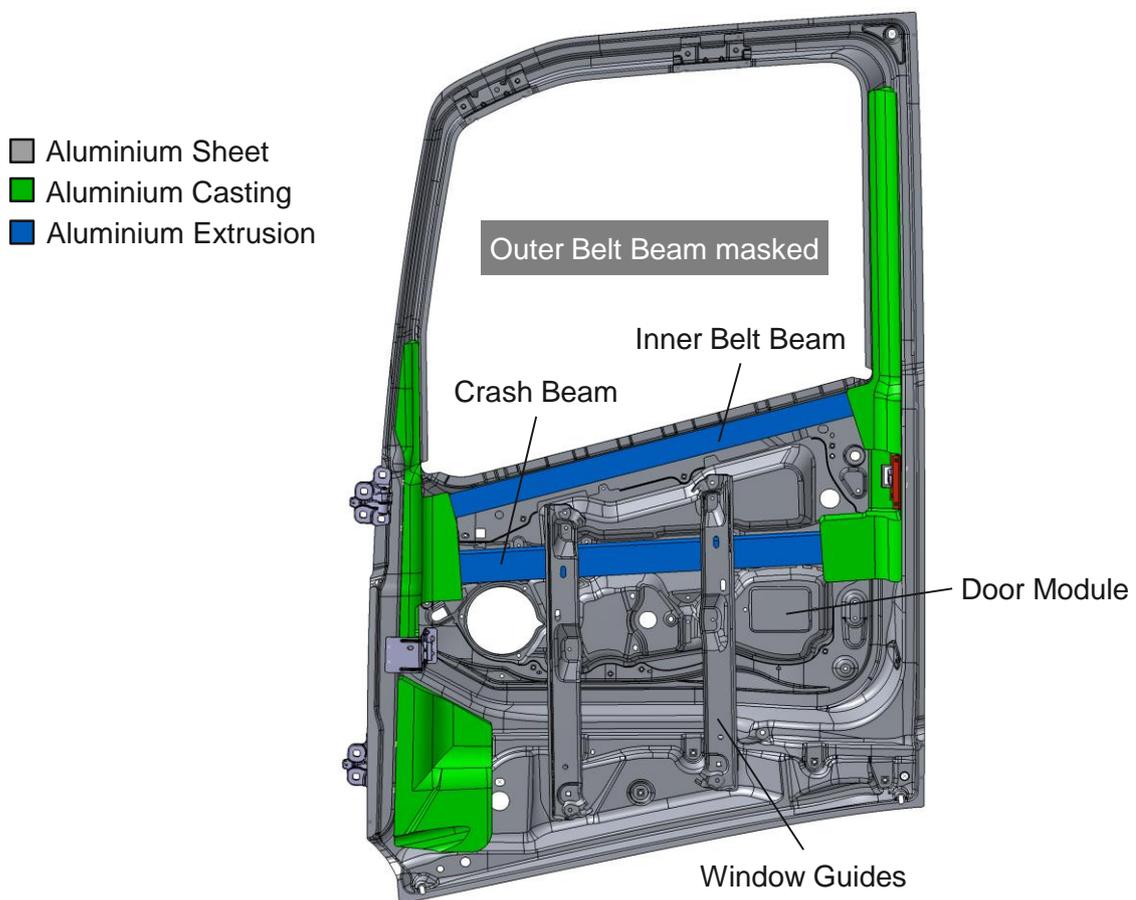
Design spaces for casting & extrusion applications (outer panel masked)
